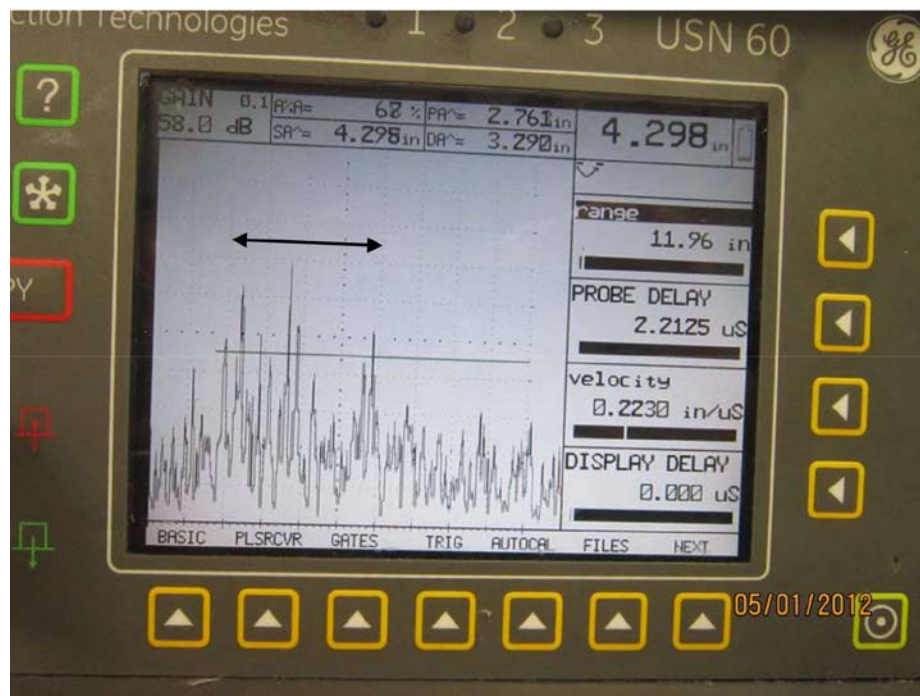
DM-05 End-of-Block through Weld
